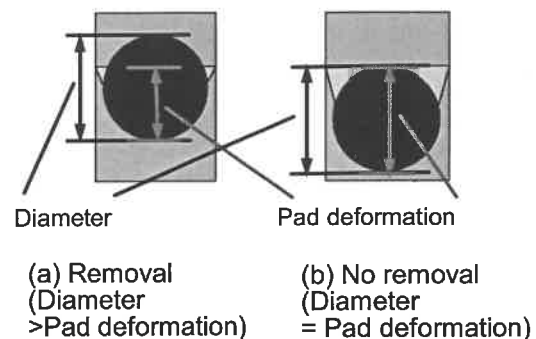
Schematic of abrasive – workpiece contact zone.
